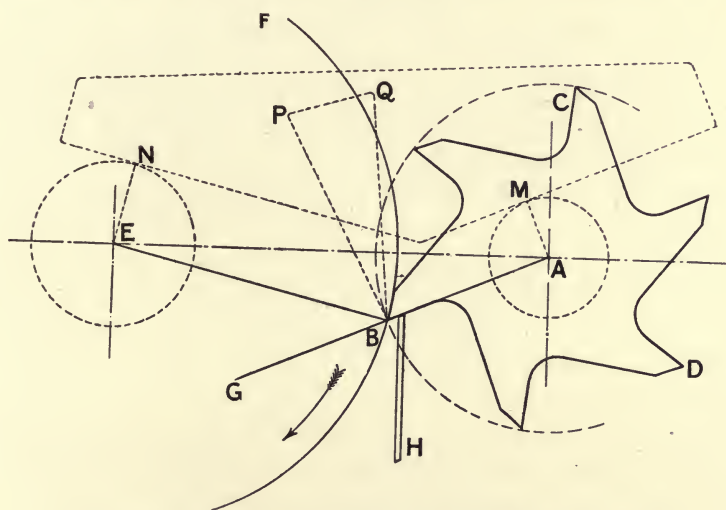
SETTING FOR CLEARANCE IN UNIVERSAL GRINDER
